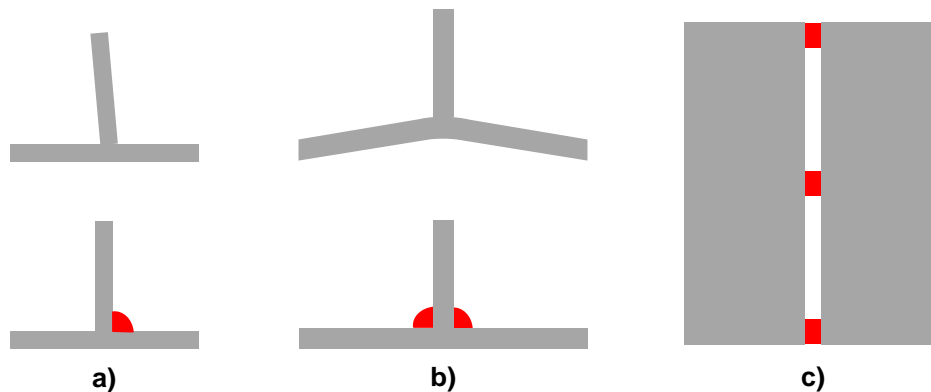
Assembly techniques to manage welding residual stresses: a) pre-setting b) pre-bending c) tacking
